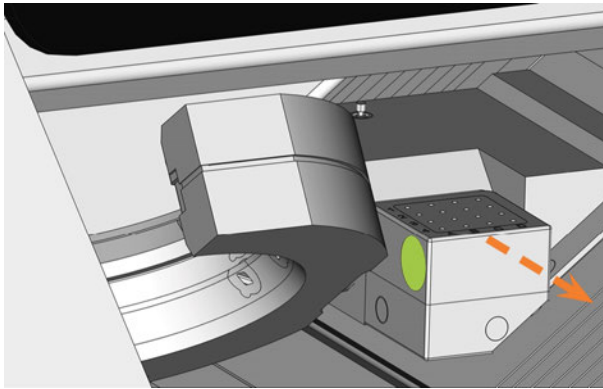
PULLING OUT THE TOOL MAGAZINE (LEFT RECESSED GRIP COLORED GREEN)
